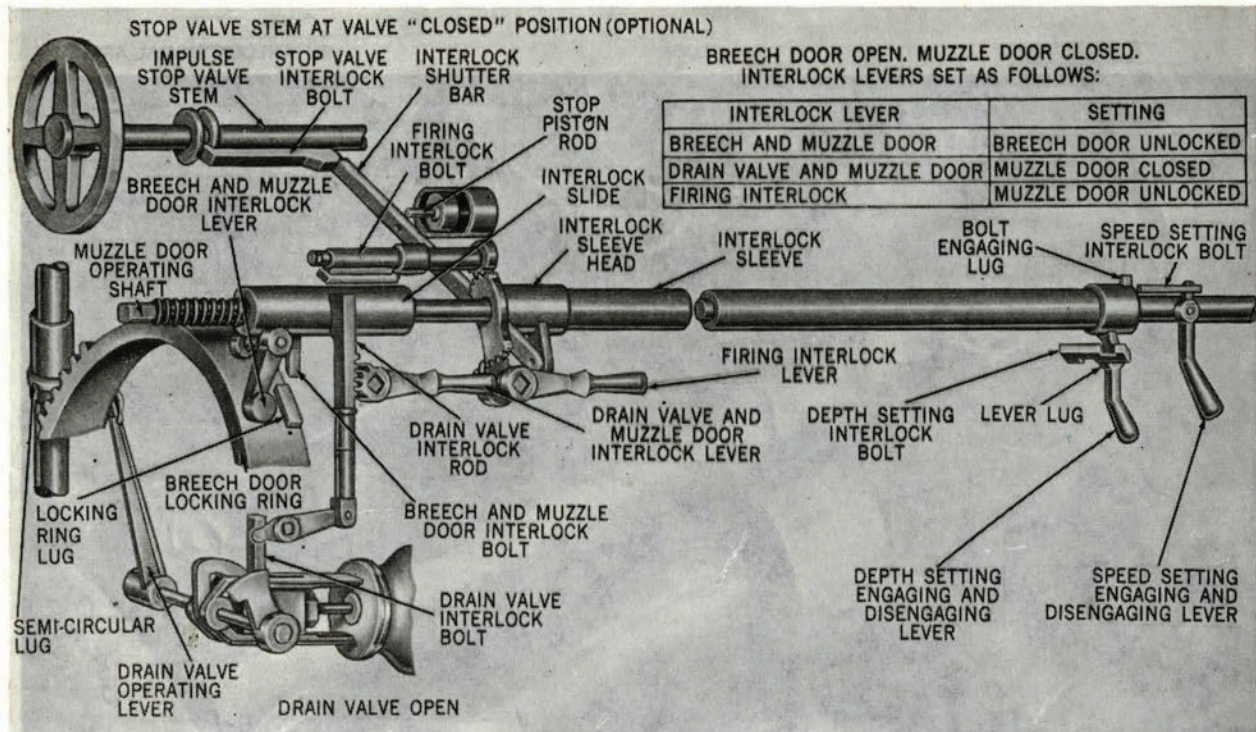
Interlocking Mechanisms—Tube Ready To Be Loaded. Tube Equipped With Hand-Operated Muzzle Door.
